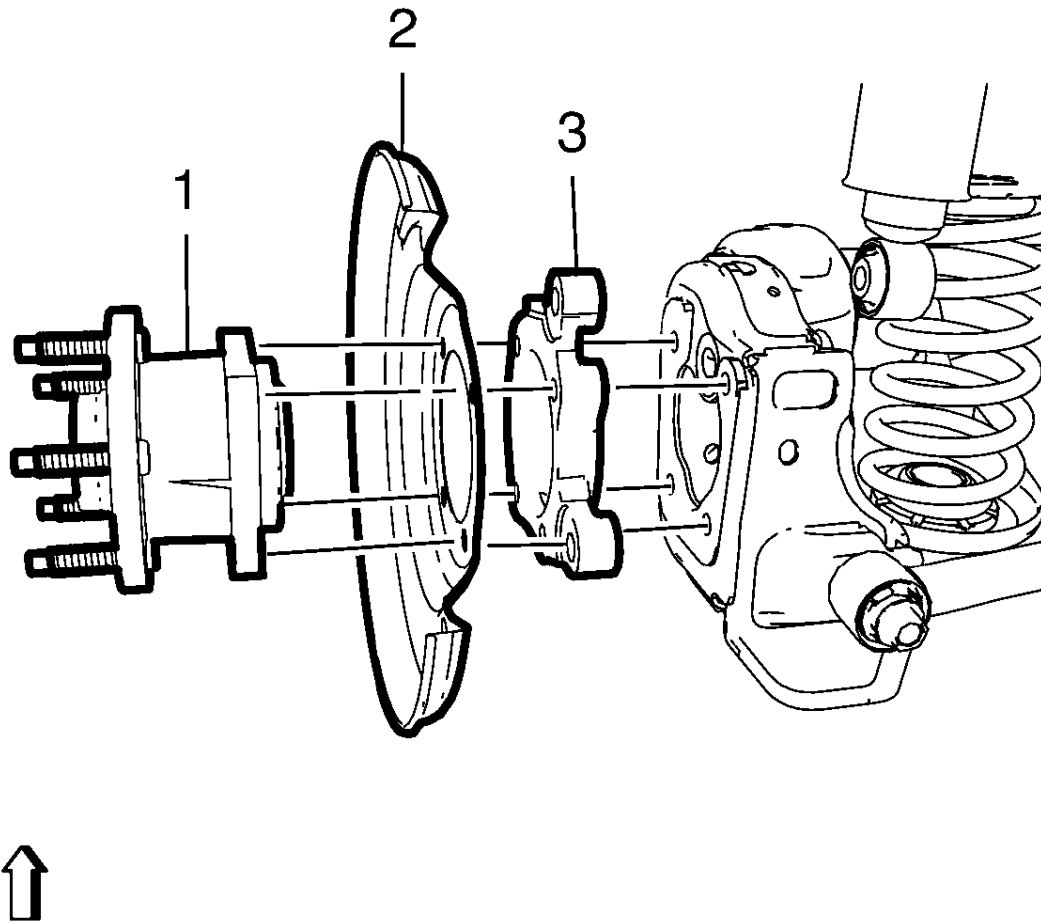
Rear Brake Caliper Mount Plate, Rear Brake Shield, Rear Wheel Bearing and Hub Assembly
